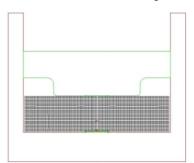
Shape of the component materials in type coat Al17-core Al forging-cross section
